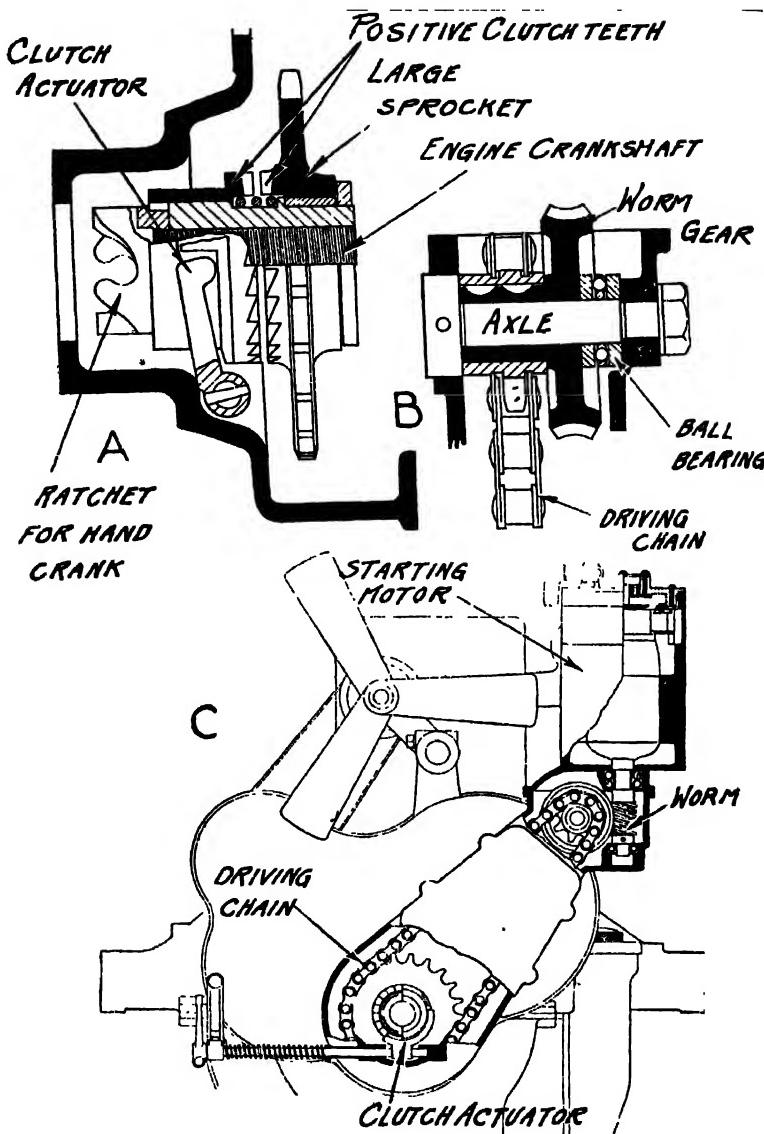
Method of Mounting Starting Motor Having Speed Reduction Through Worm Gears and Roller Chains.
